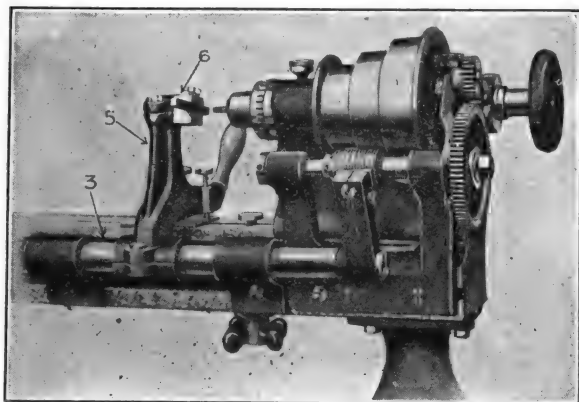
A screw-cutting attachment for the precision bench lathe.
